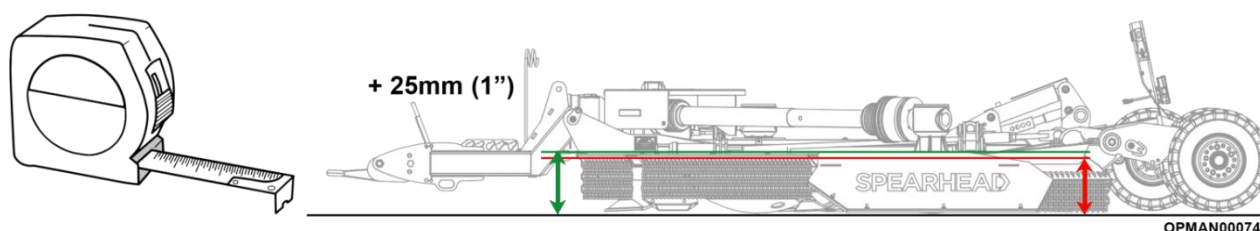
Multicut 460/620 Front To Rear Machine Levelling
